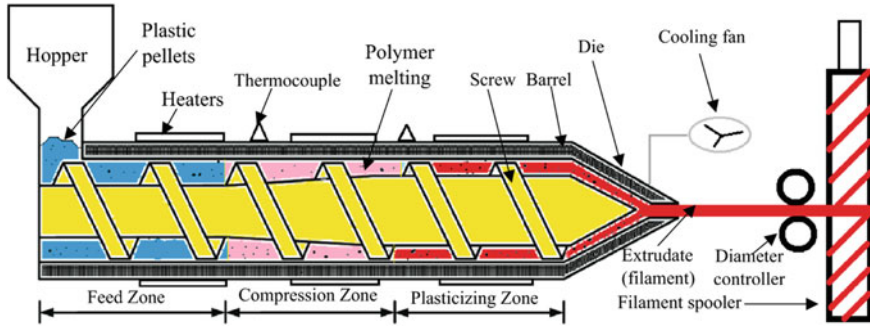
Schematic diagram of extrusion process for making matrix and reinforcement spool for 3D printing [44]
